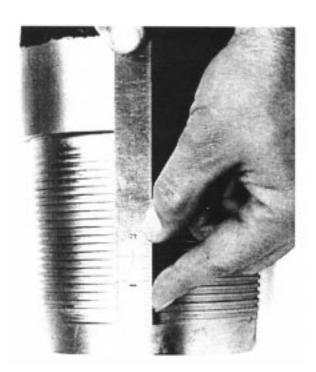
Scale Positioned on Extreme-Line Pin for Measuring the Thread Length
